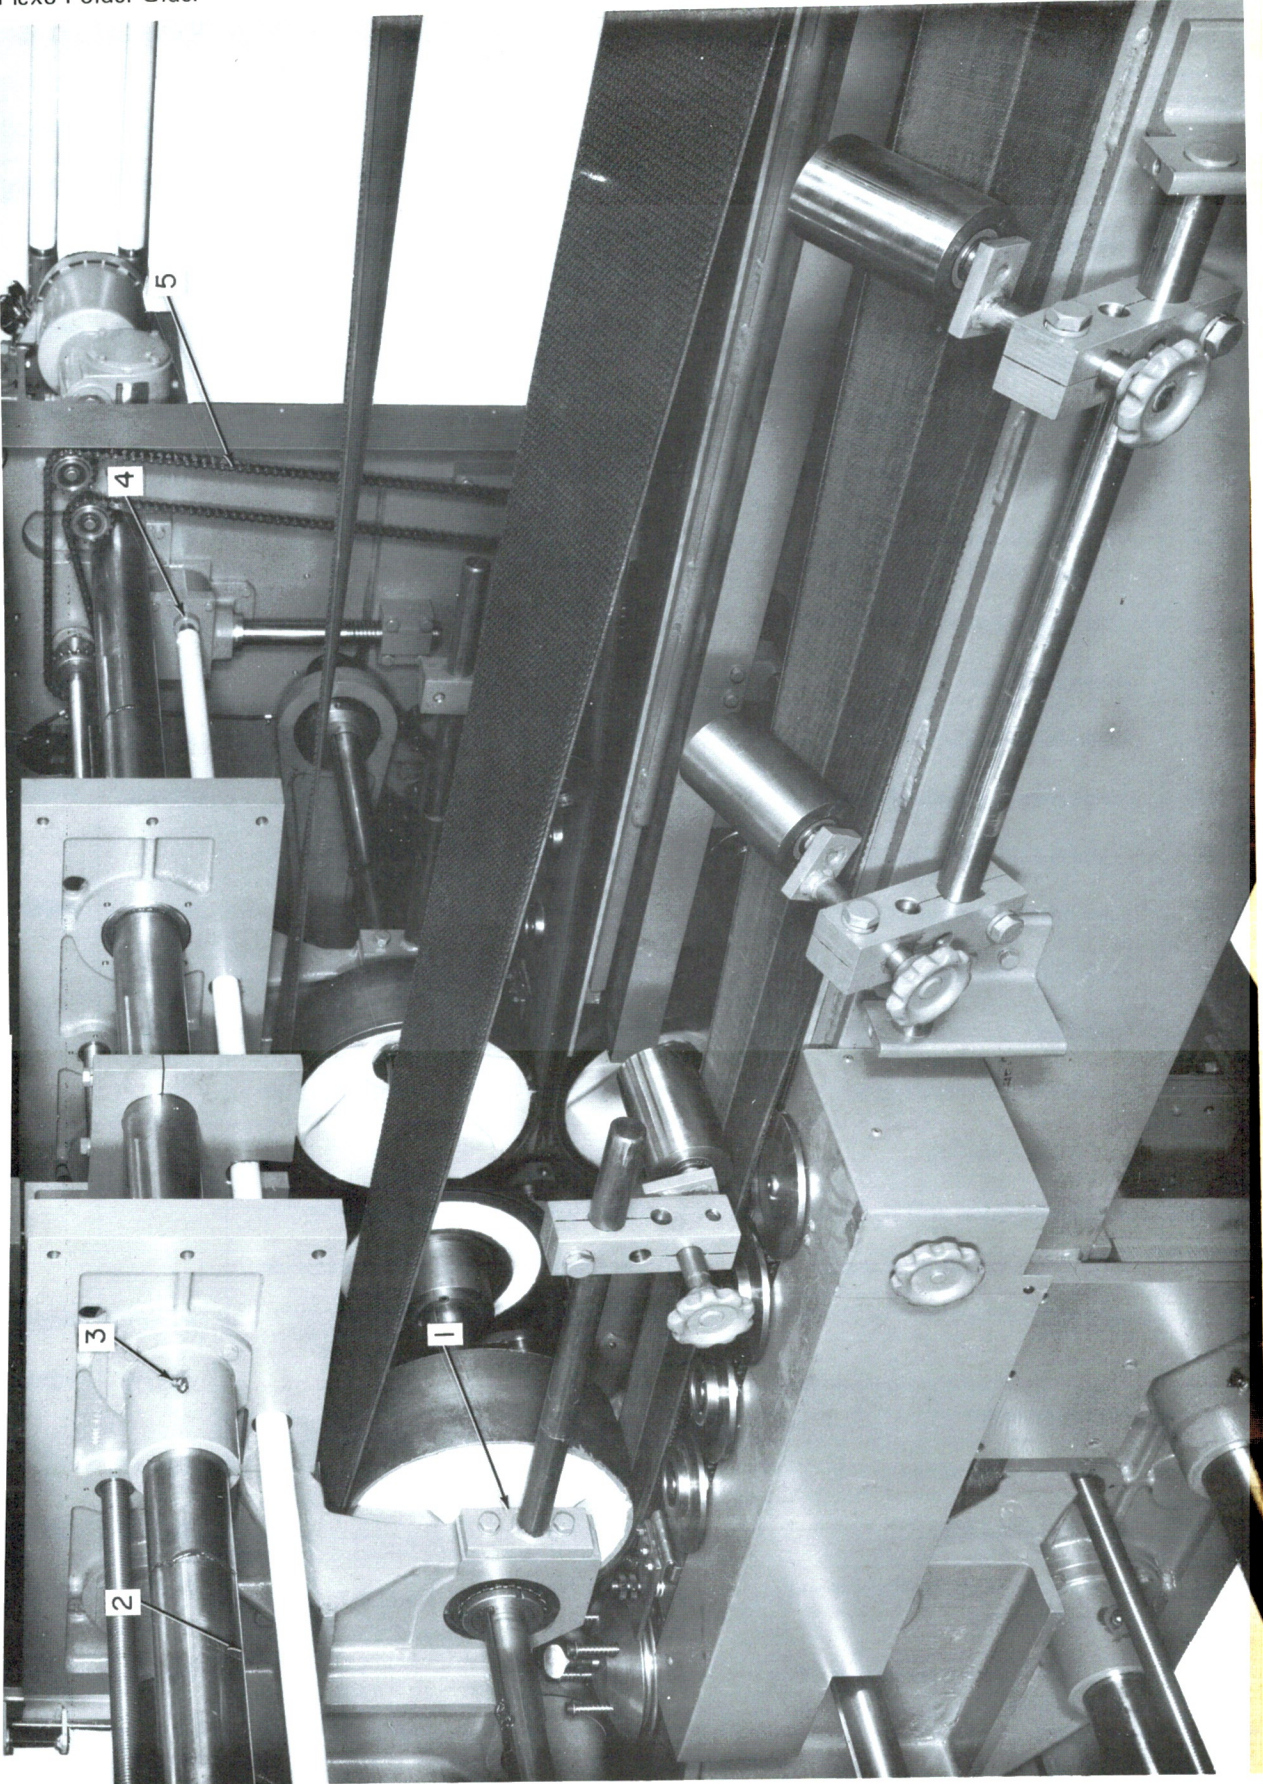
DELIVERY END LUBRICATION, OPERATING SIDE
